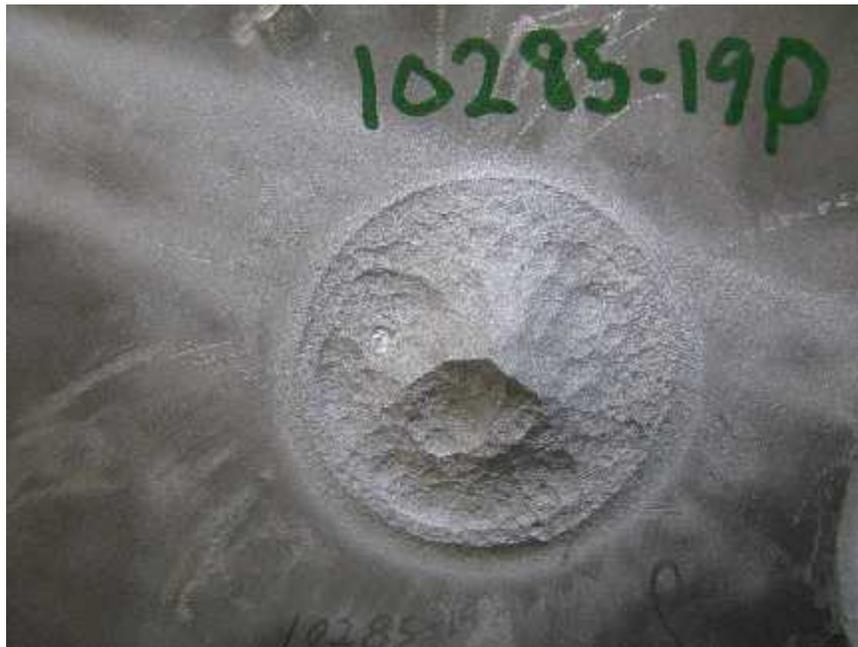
Typical hole filled with cold sprayed aluminum powder.
